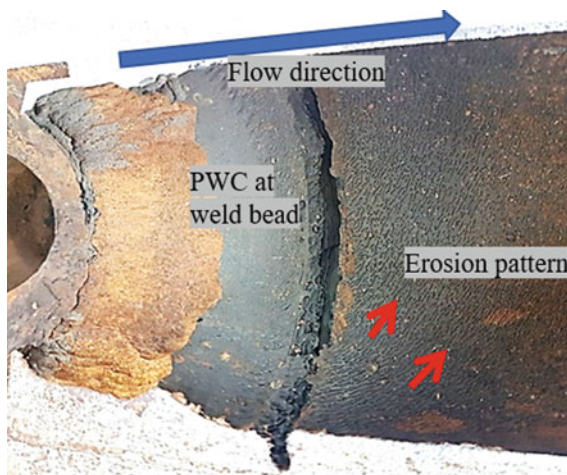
Localized damage including erosion corrosion and preferential weld corrosion (PWC)
